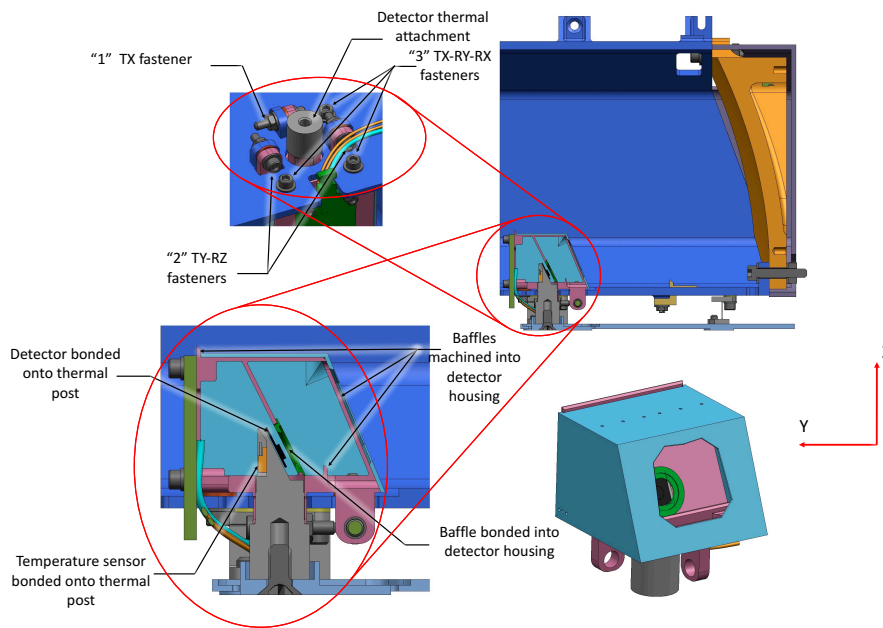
Detector semi-kinematic attachment to the receiver housing (top left), detector assembly section view (lower left), receiver section view (top right), and detailed three-dimensional (3D) view of the detector assembly (lower right) (figure updated from [41]).
